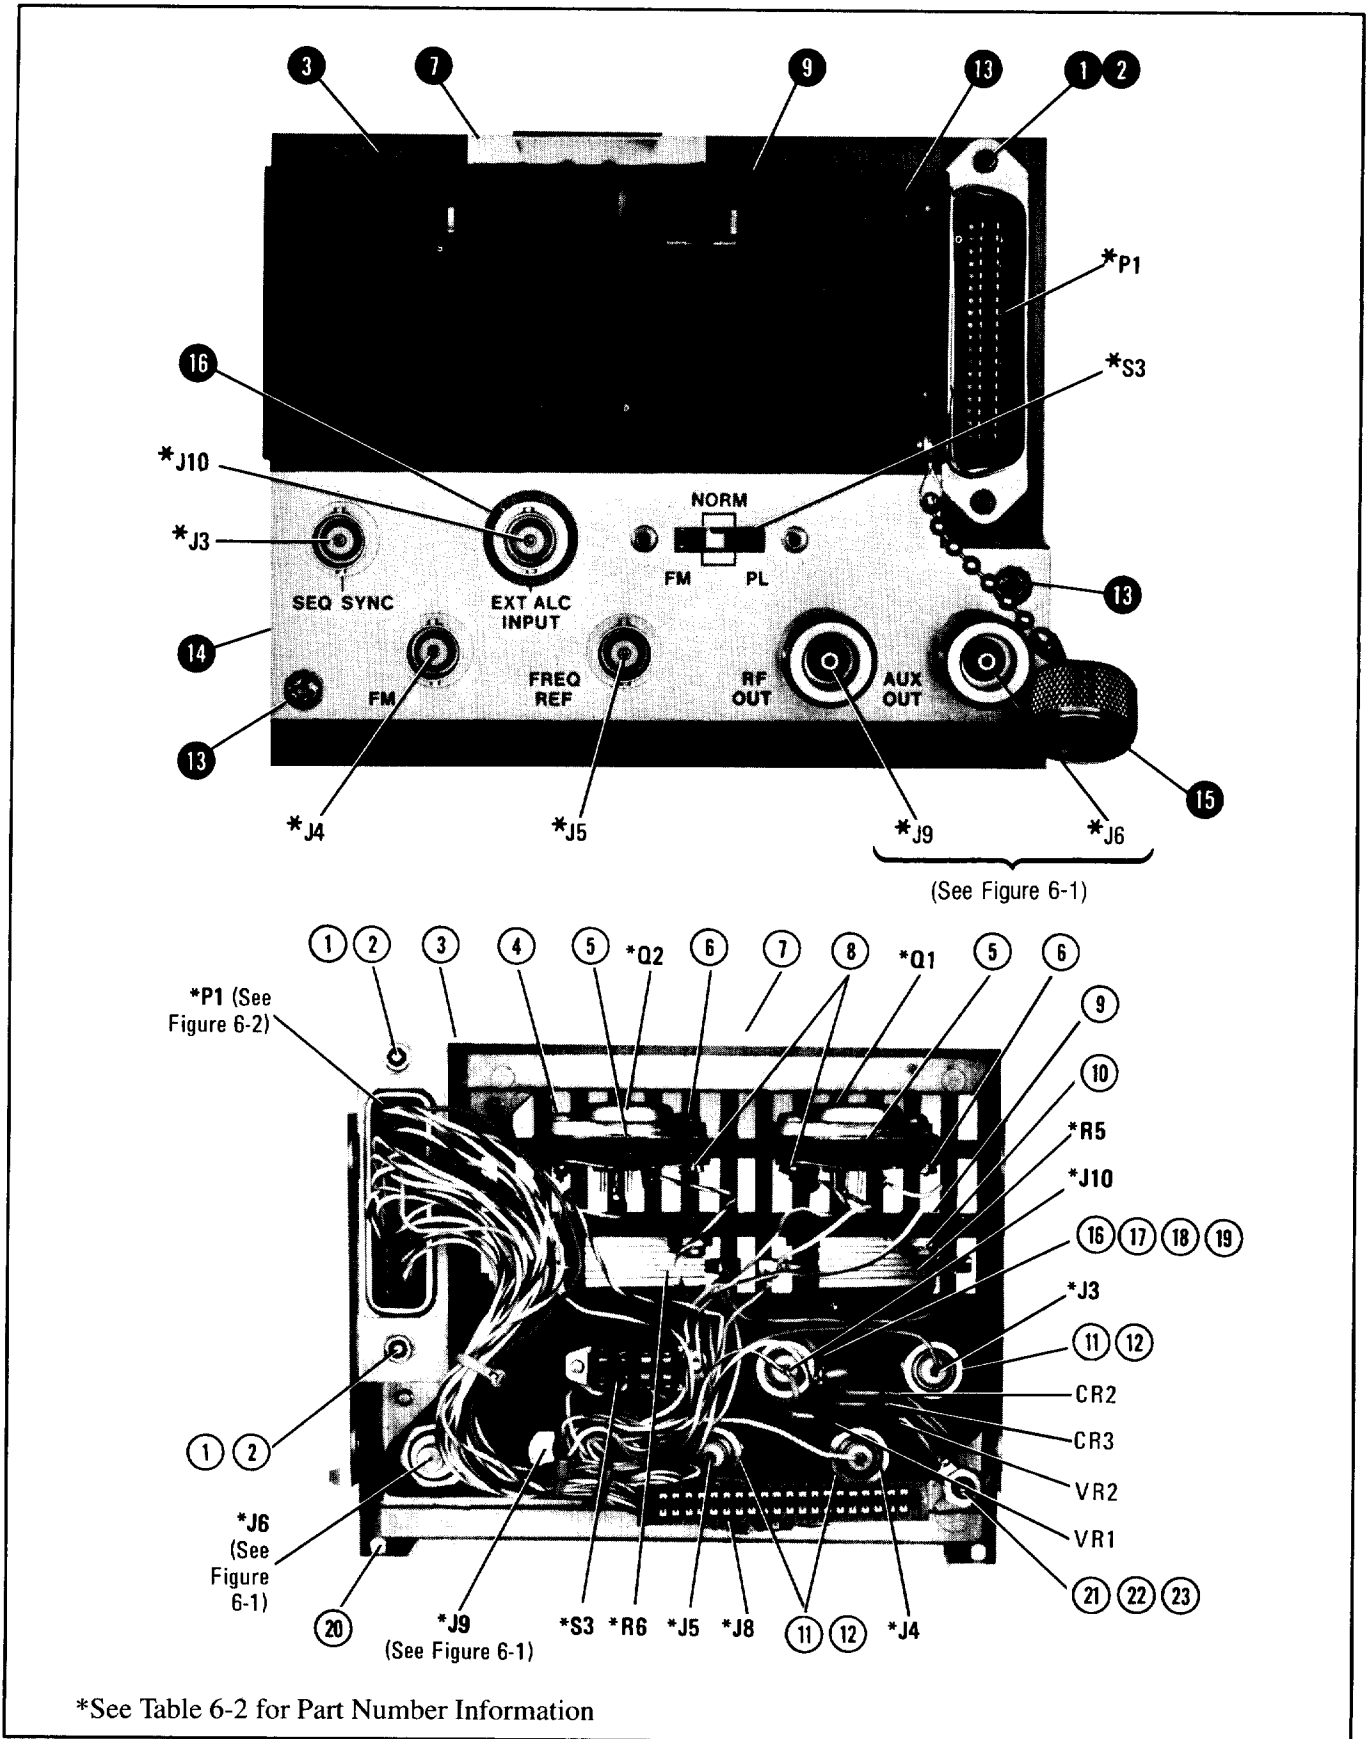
Rear Panel Parts Identification (3 of 4), Option 004
